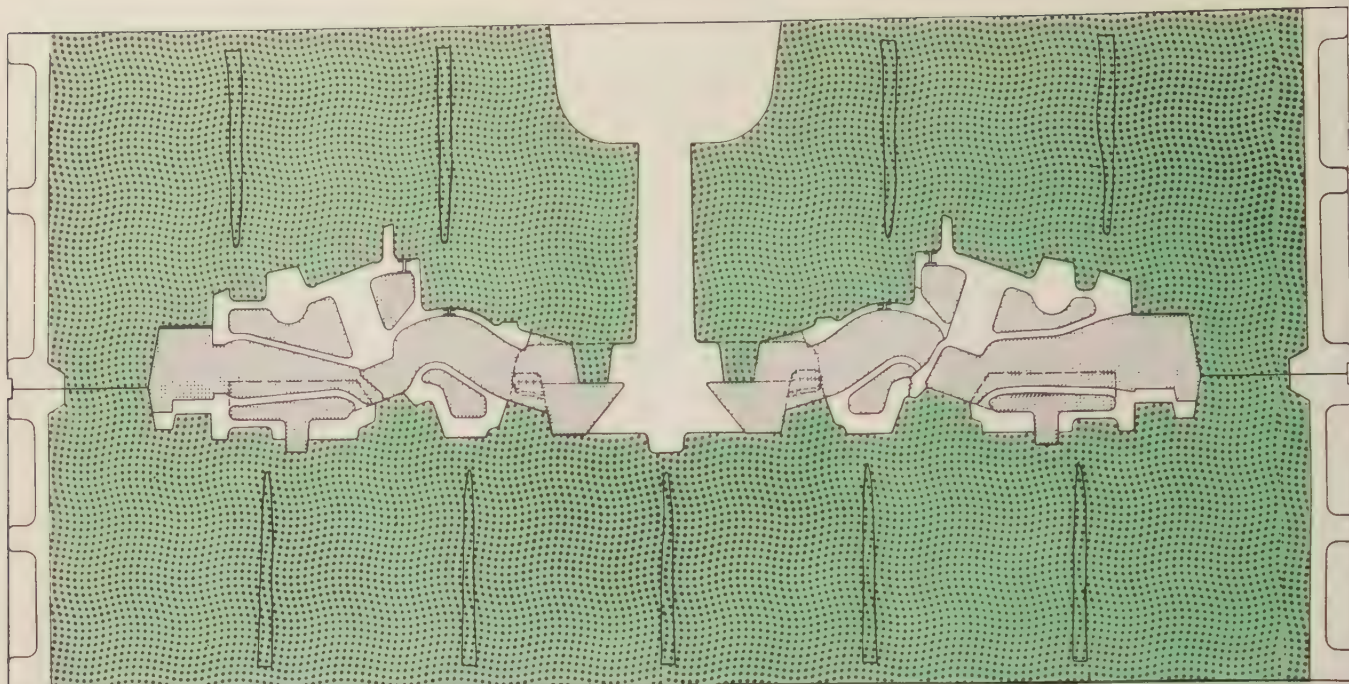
A cross section through the cylinder-head mold shows that two heads are cast in each flask for economy of production. The cores are securely positioned by the use of core prints and by small metal chaplets which fuse with the hot iron. These expedients prevent the cores from floating away under the buoyant effect of the heavy liquid-metal. This buoyant force can be three times the actual weight of the cores when gray iron is being cast.
